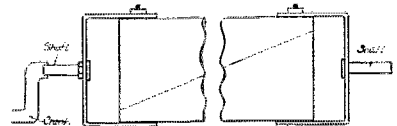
A MOUNTING THAT MAY BE USED IF THE LATHE IS NOT AVAILABLE WHEN THE WINDING IS TO BE MADE
